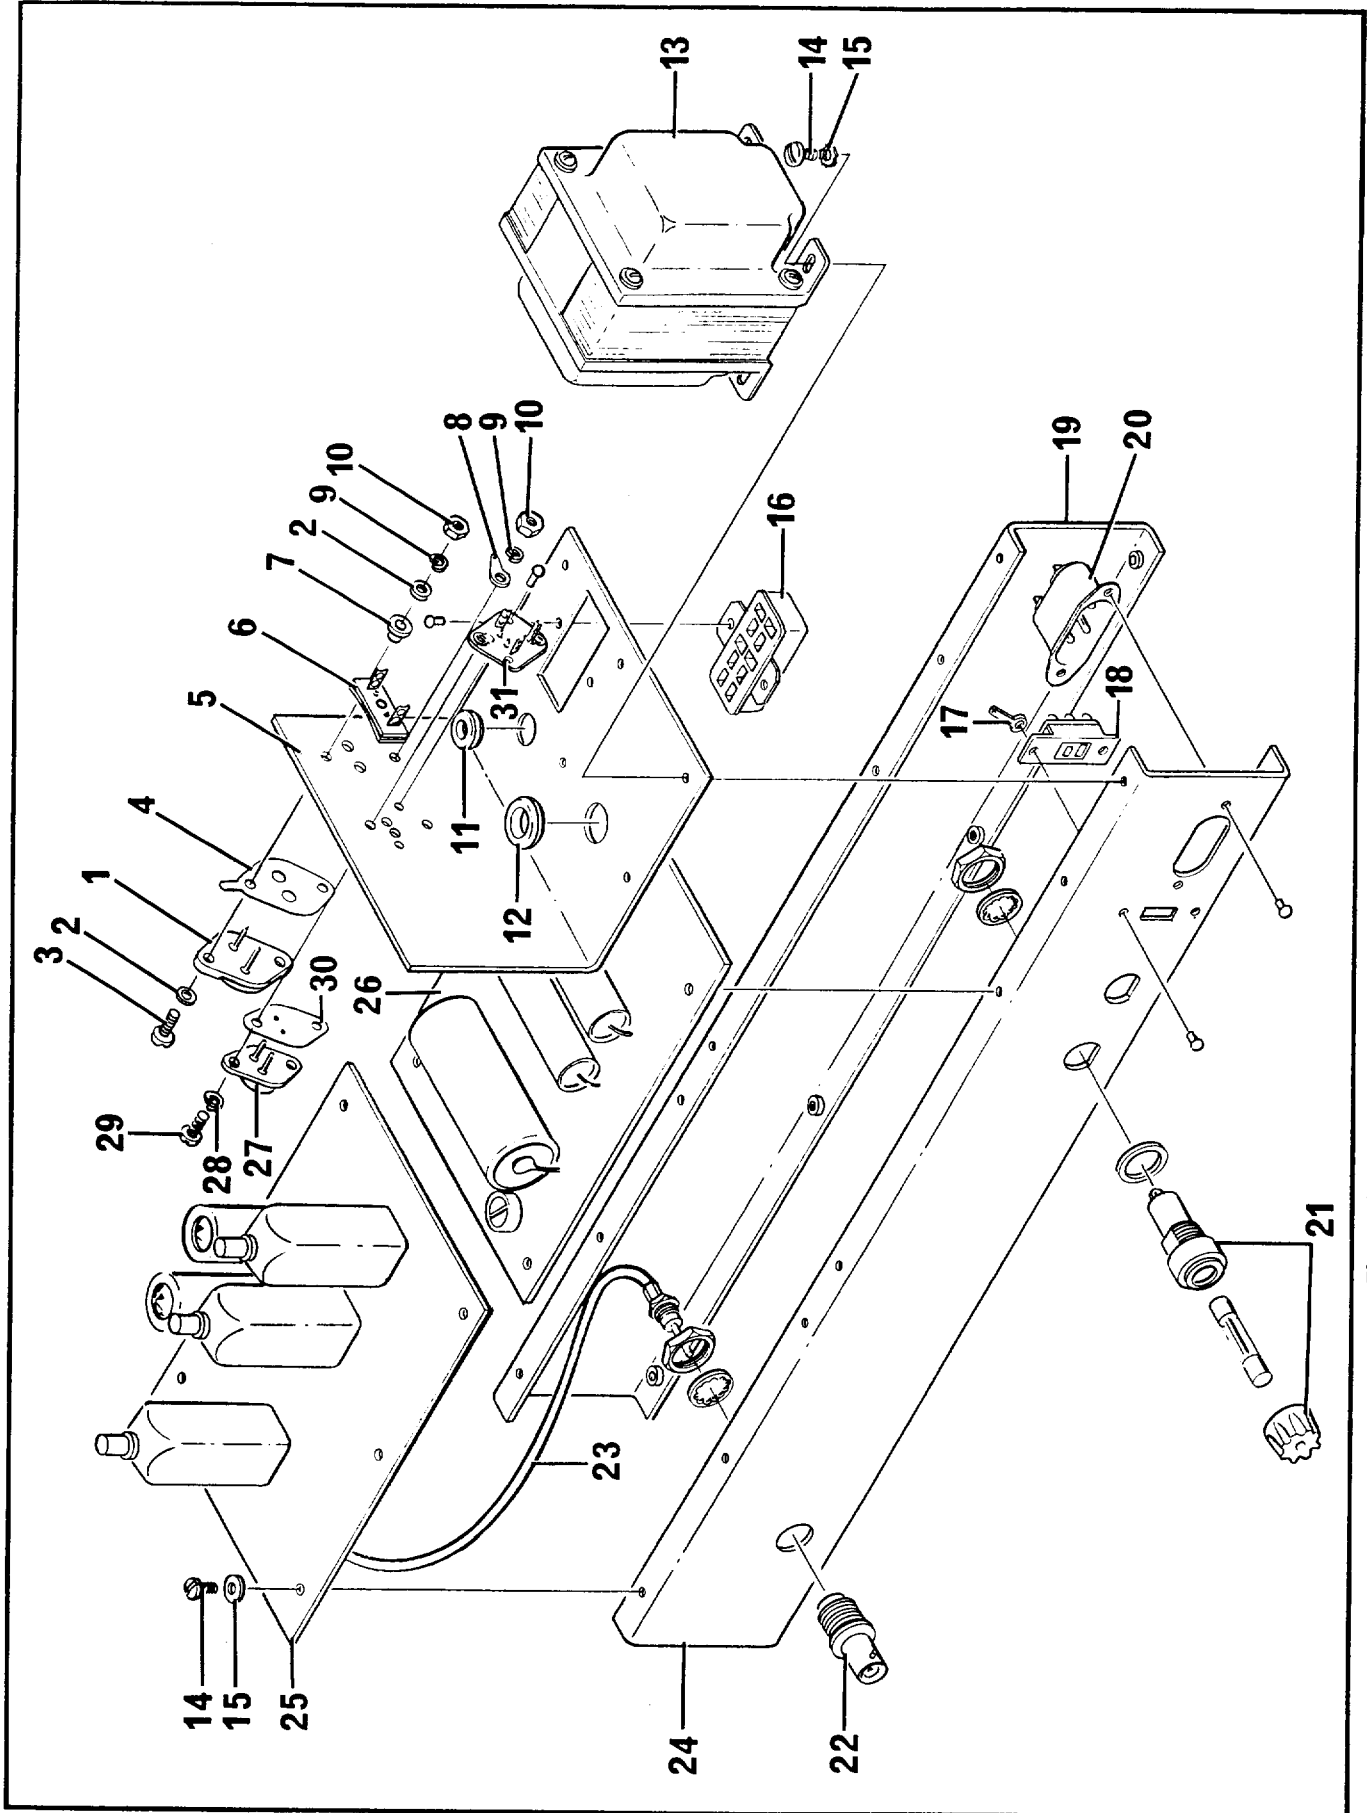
POWER SUPPLY & IF AMPLIFIER ASSEMBLY
